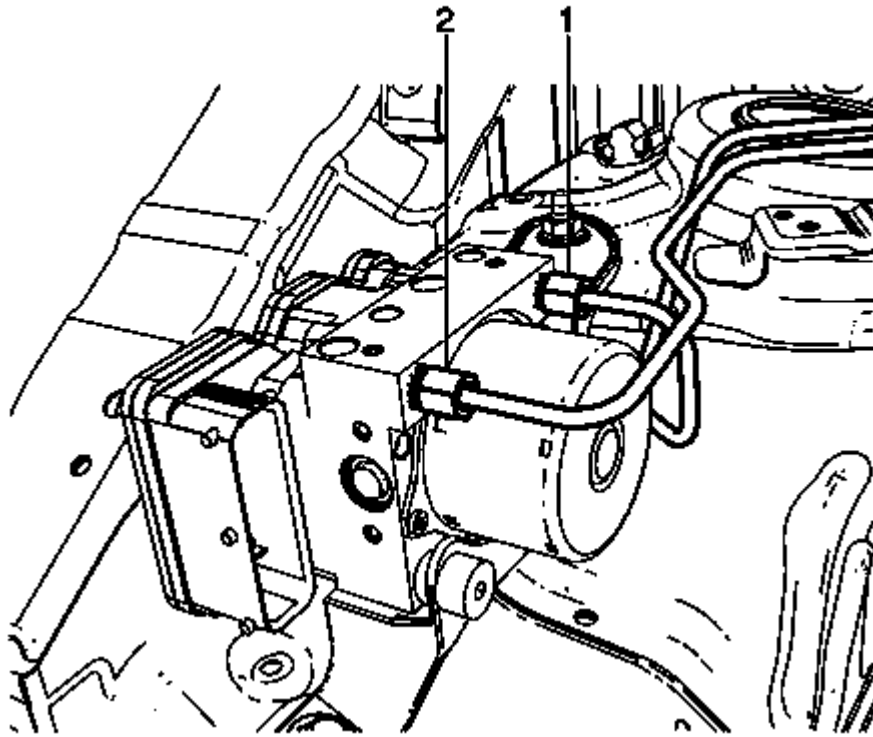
Master Cylinder Primary Brake Pipe Fitting
